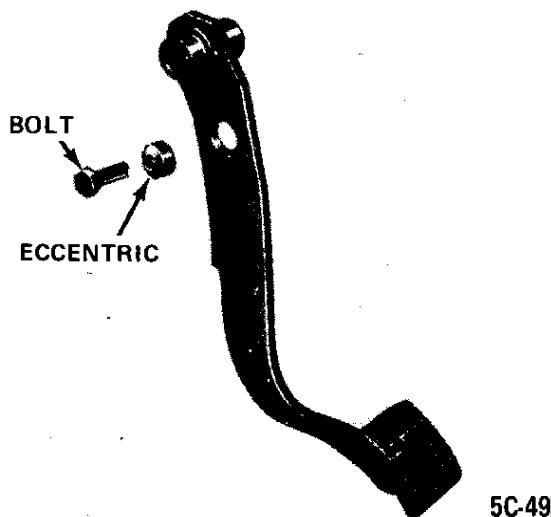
C-49 Brake Pedal Attaching Bolt and Eccentric
